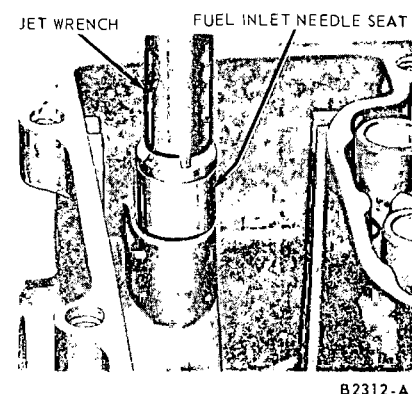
Fuel Inlet Needle Seat Removal or Installation
